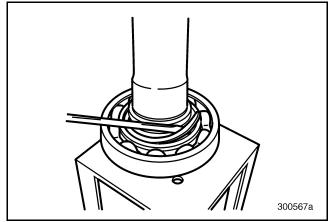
Removing Spiral Snap Ring from Main Drive Pinion
